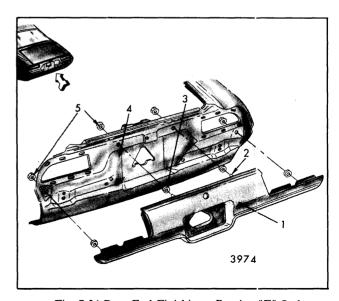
Rear End Finishing - Pontiac "F" Styles
